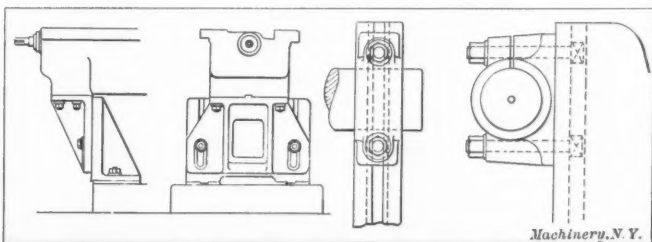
Typical Support for Knee. Fig. 23. Split Bearing for Clamping Overhanging Arm
